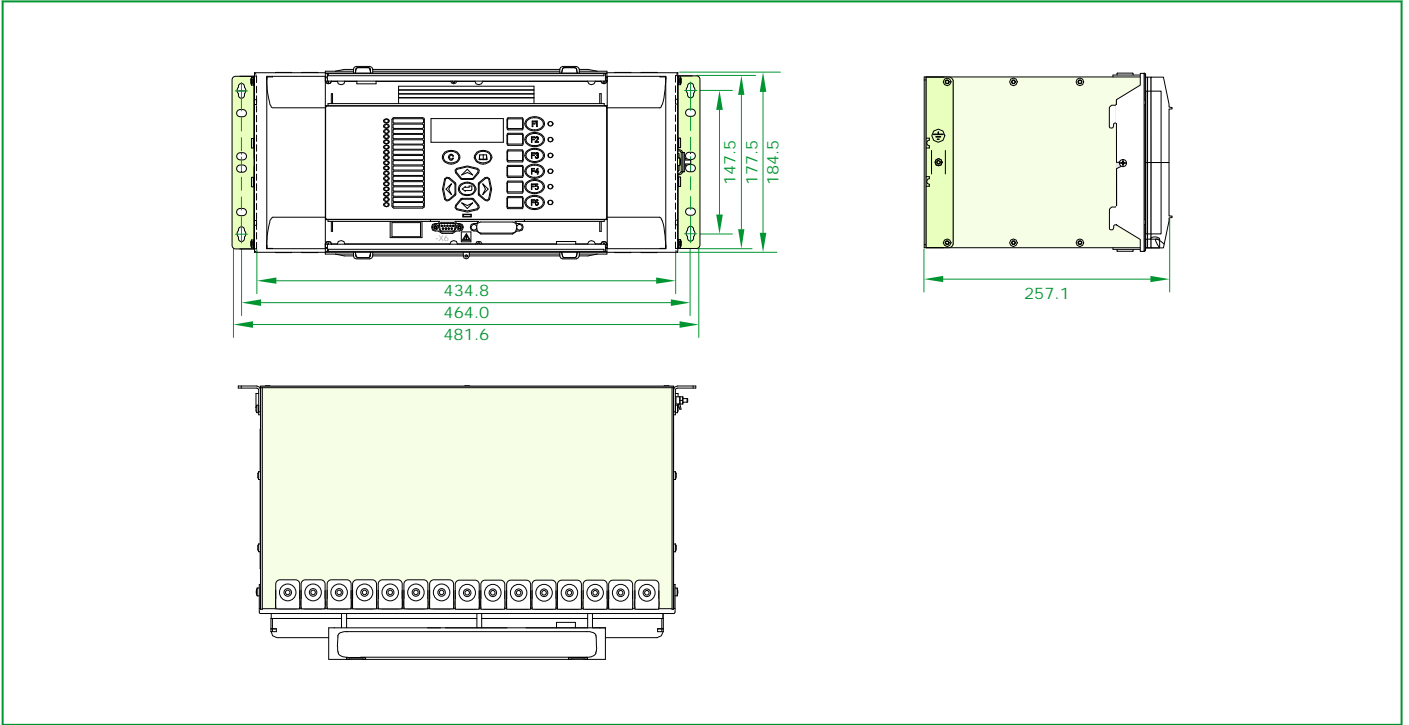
Surface-mounted 84 TE case. (Dimensions in mm.)
